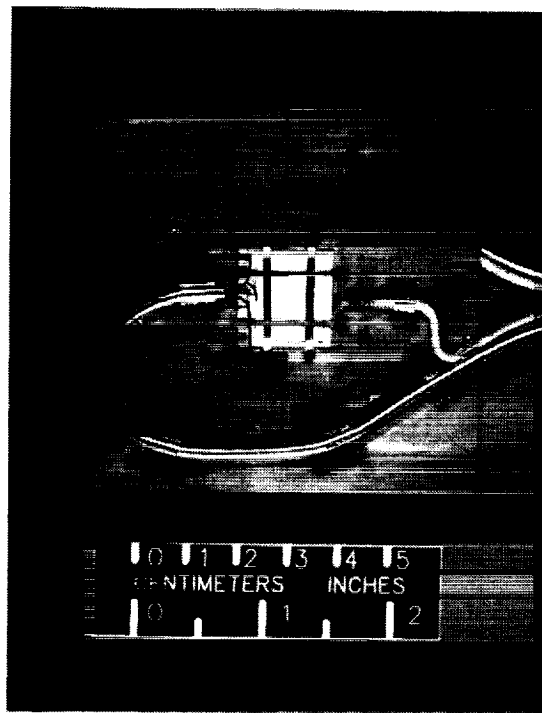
Final assembly. Nextel blanket secured and lead wires attached.
